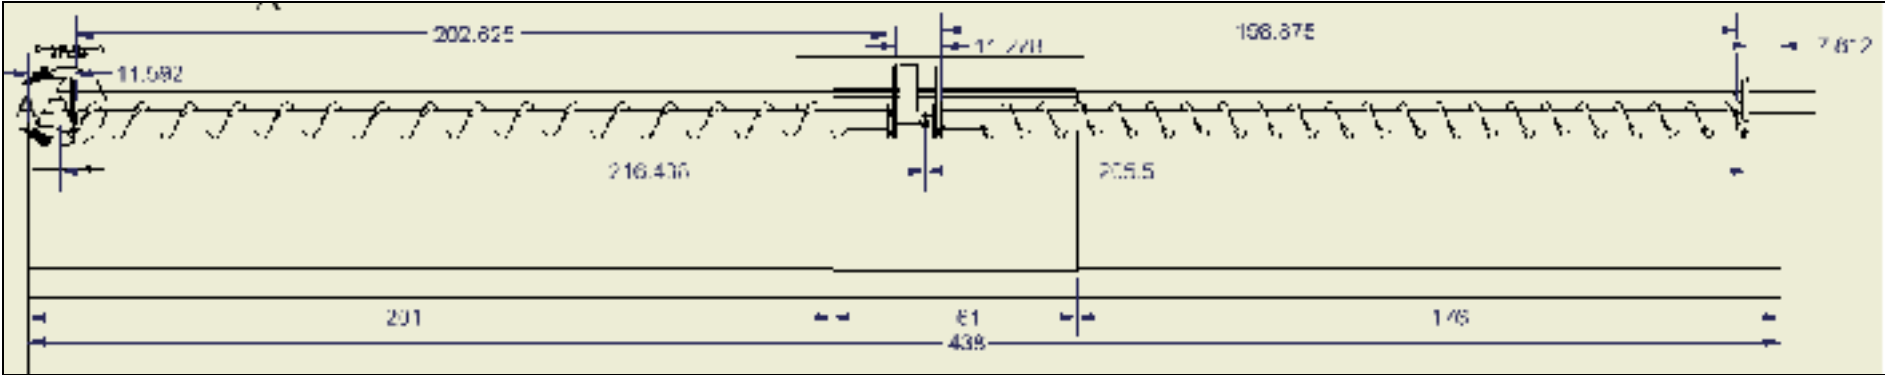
SPACING TO WELD ON THE MOUNTS
